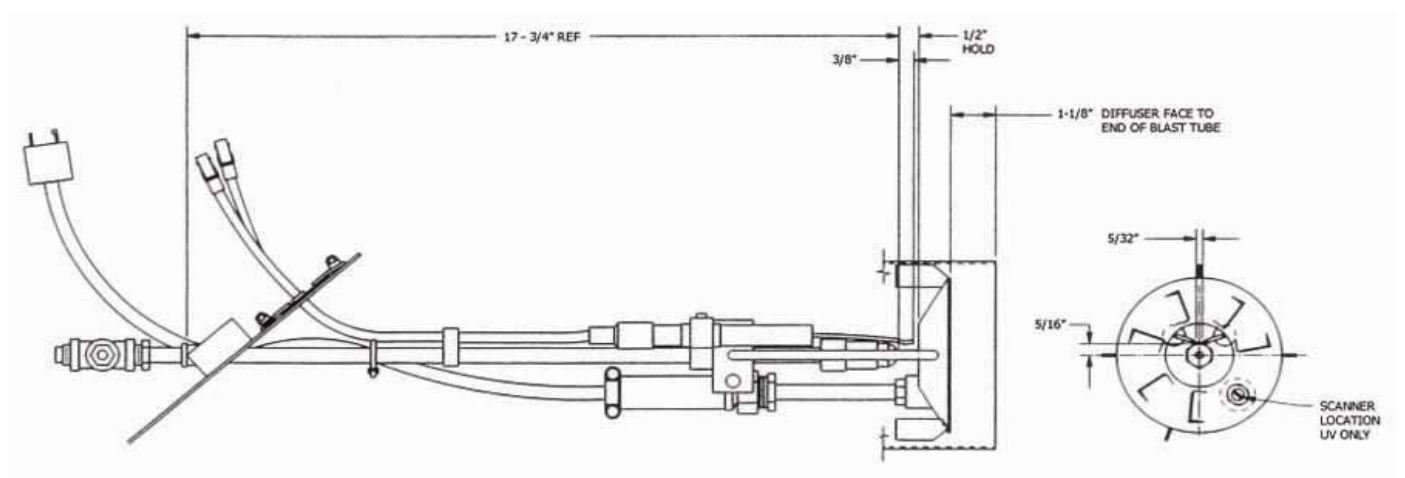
FPL 8, 9, 11, & 12 Drawer Assembly Direct Spark
